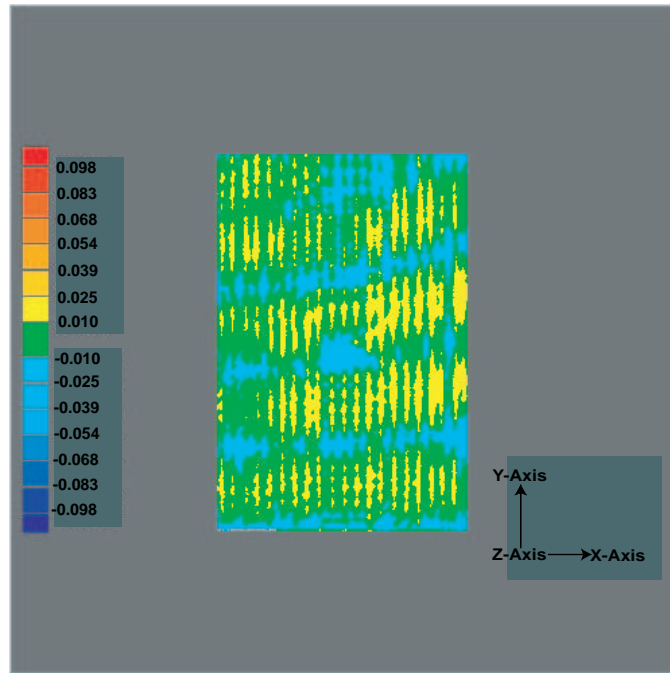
Scanned surface of example 1 with tolerance 0.05 inches
